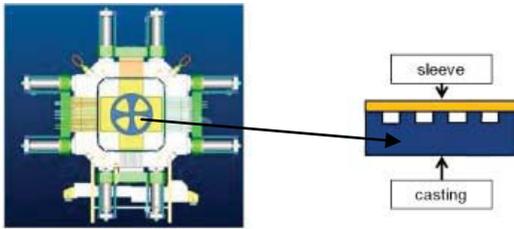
Die casting mould with four sliders which forms a one side formation of the cooling channels. (right: enlarged section of the outside area of the stator)
